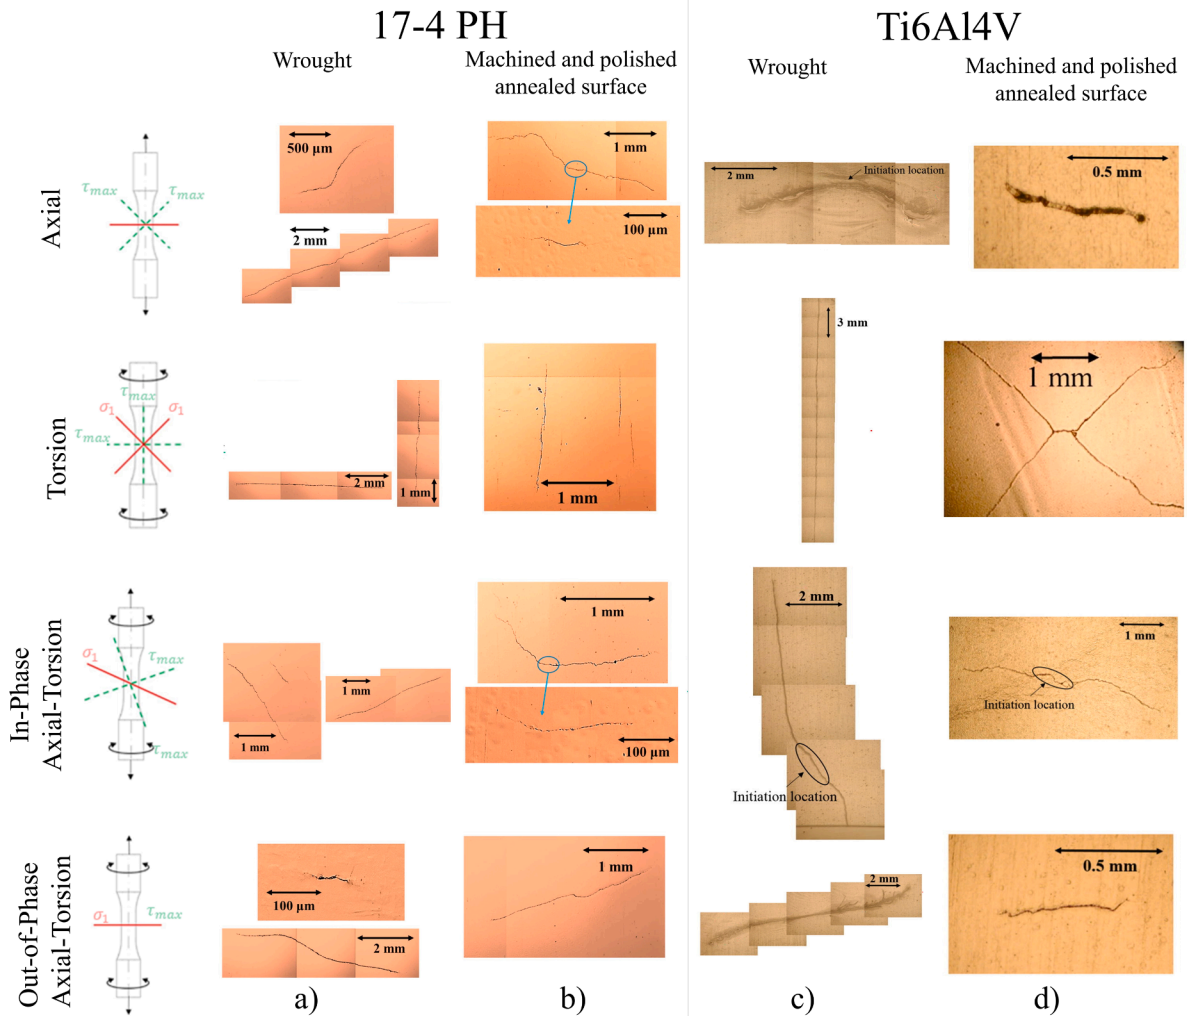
Failure crack paths showing branching for a) wrought and b) AM machined surface 17-4 PH and c) wrought and d) AM machined surface Ti6Al4V specimens under different loading conditions; solid red lines indicate maximum principal plane orientations, dashed green lines represent maximum shear plane directions, and dashed black lines indicate Fatemi–Socie (FS) critical plane orientations. The maximum principal plane and maximum shear plane directions are reported for each loading conditions for a better interpretation of the failure mechanism. Figure adapted from [208].
